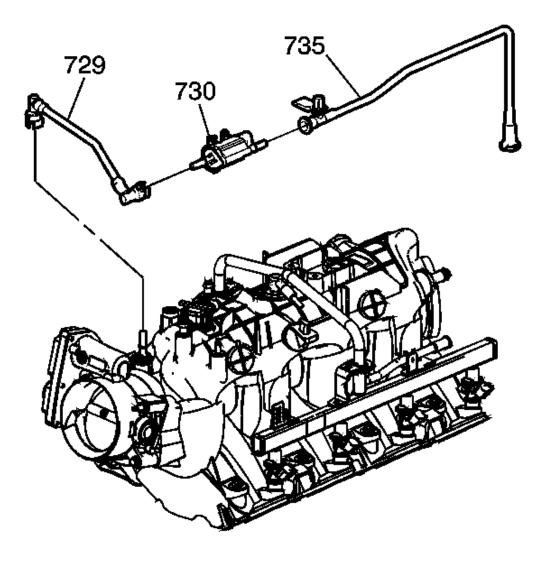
EVAP Purge Valve & Tubes Courtesy of GENERAL MOTORS CORP.
